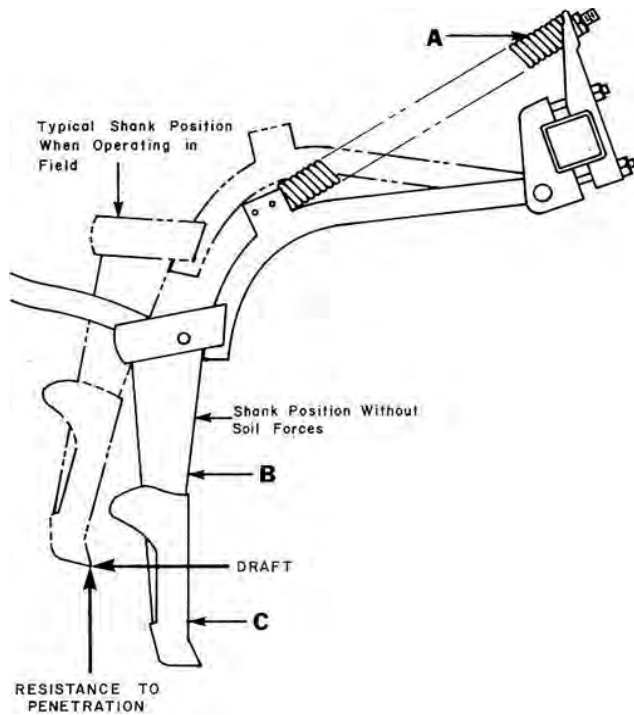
Hoe Assembly: (A) Opener Pressure Spring, (B) Shank, (C) Hoe Opener.
